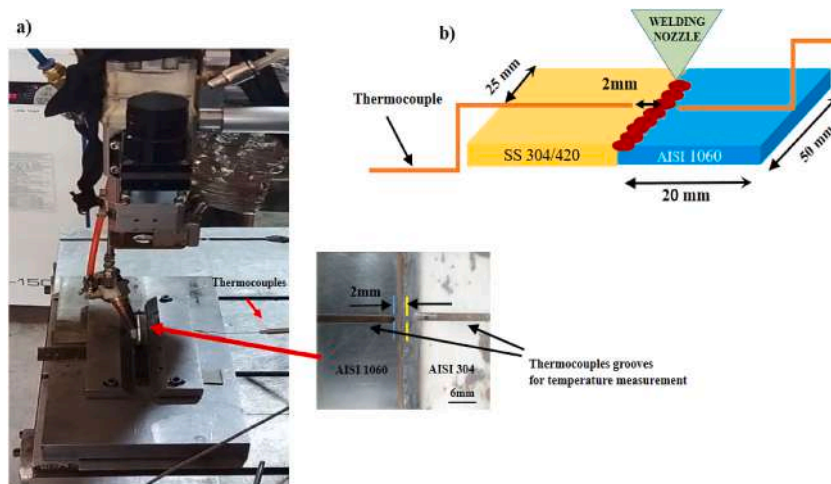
The dissimilar laser welding setup of experiments for a) actual view, b) schematic view.
